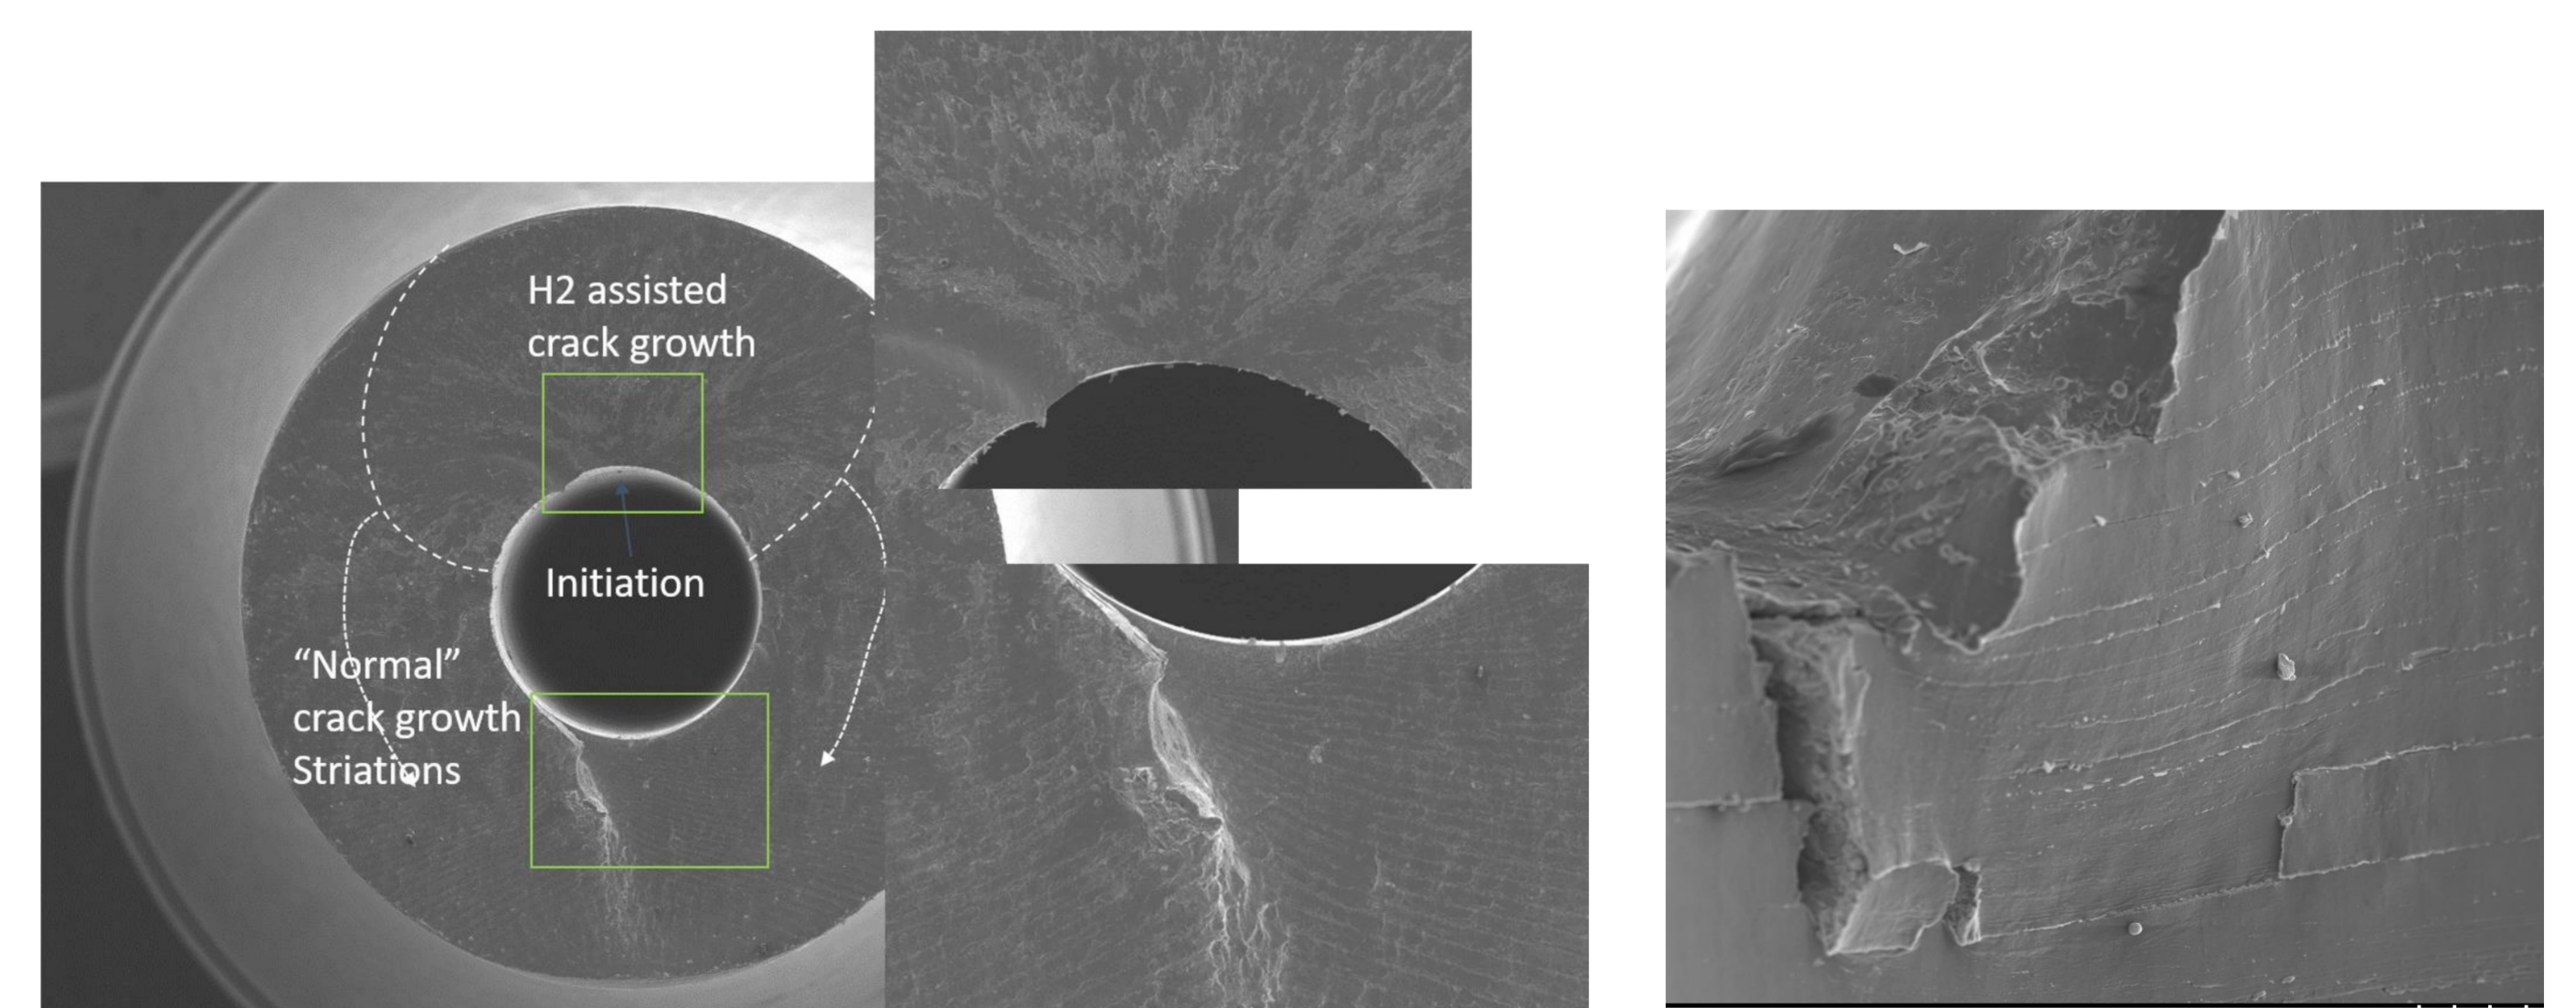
SEM investigation of two cracked tubular specimen tested with 50 bar of hydrogen inside. Left: Looking onto the crack surface Right: Looking on the inside wall
